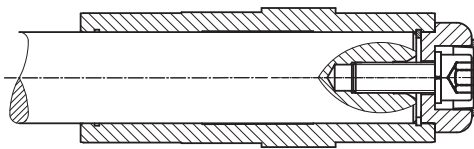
Gear unit mounted to shaft without a shoulder using the fastening element
